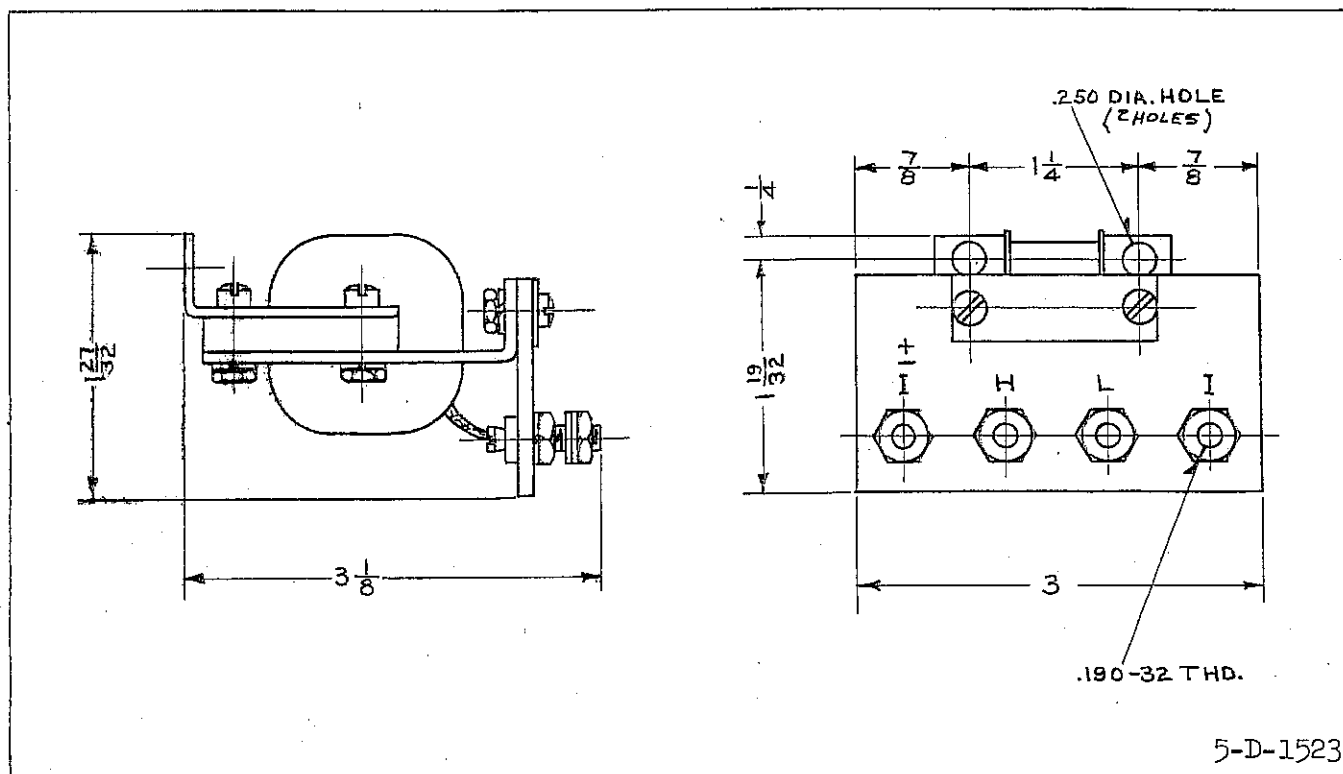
Outline of the Test Milliammeter Auxiliary Transformer.
